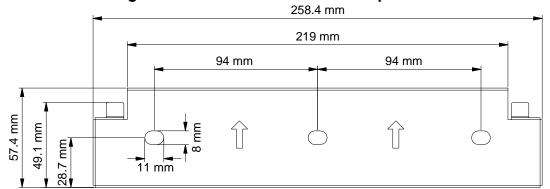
Rear panel dimensions of R5-(0.7K-3K)-S1-15
